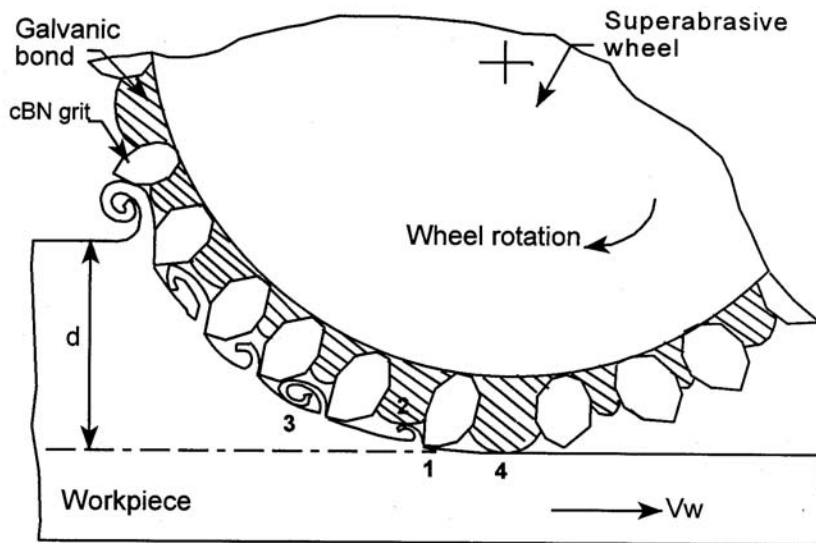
Elevation of the status of grinding to abrasive machining
